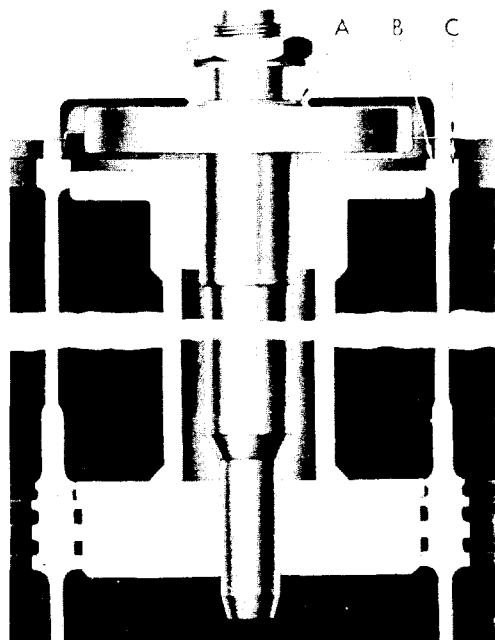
Placing of adjusting reamer in cylinder liner seat
